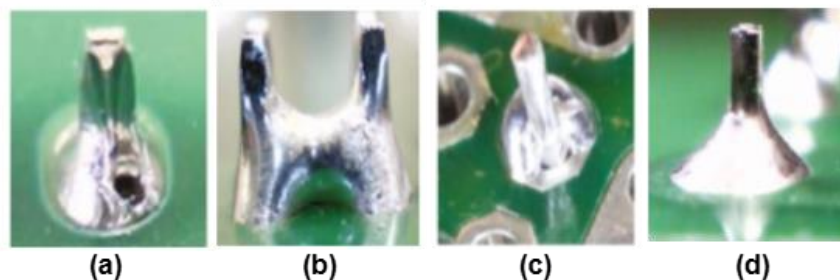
Type of defects considered in the practicum assessment (a) hole solder, (b) Bridge soldering, (c) Void on solder pad (d) Good soldering
